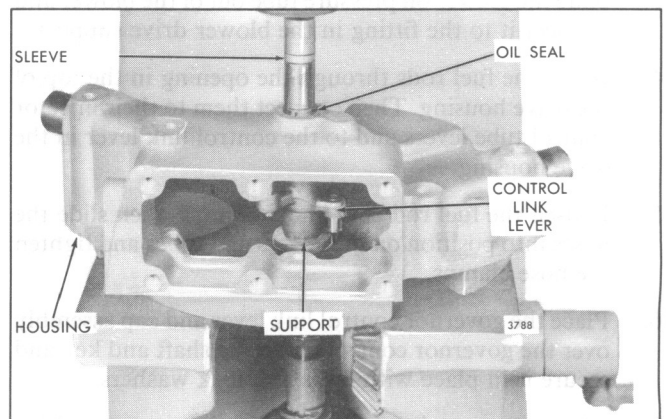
Installing Control Link Lever Shaft Oil Seal in Governor Drive
